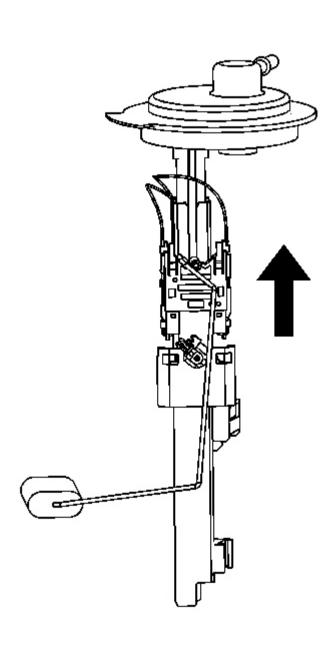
View Of Fuel Level Sensor (Secondary) Courtesy of GENERAL MOTORS CORP.
